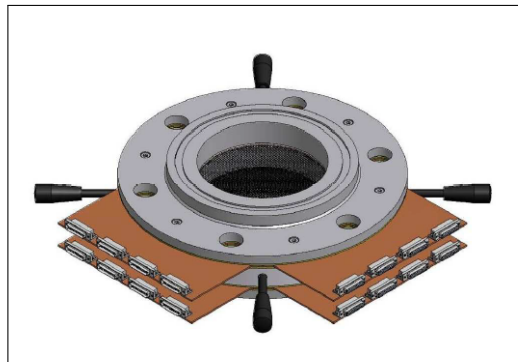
CAD of a wire-mesh sensor assembly that is placed into the vertical test section of the TOPFLOW DN200 assembly [8].
